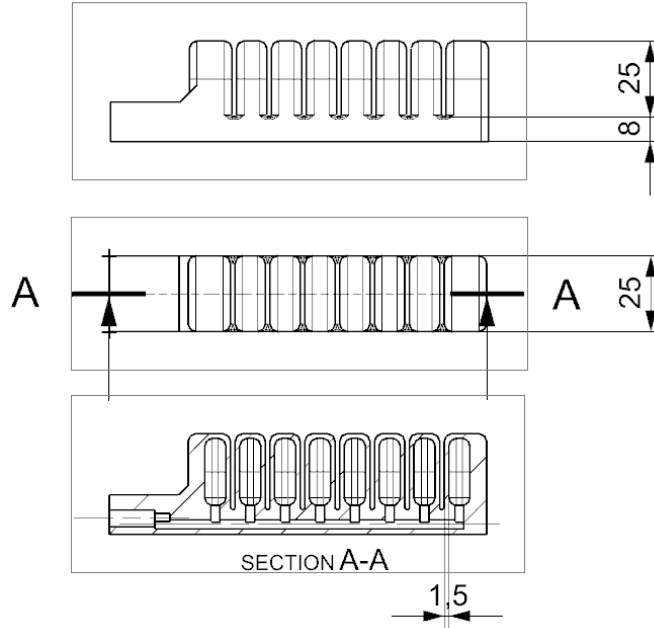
Technical drawing of the single reference gripper. Reference dimensions are shown in millimeters.
